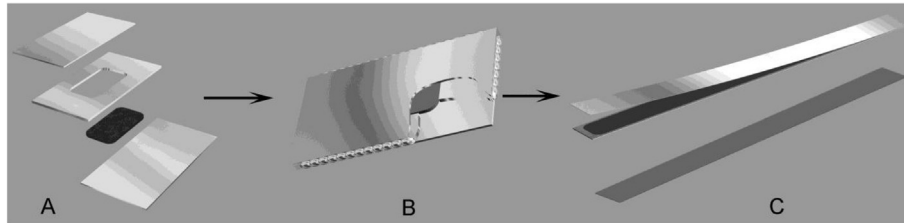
Fabrication of UAl_x -Al dispersion targets. A - picture-frame assembling, B - welding, C - after rolling.
